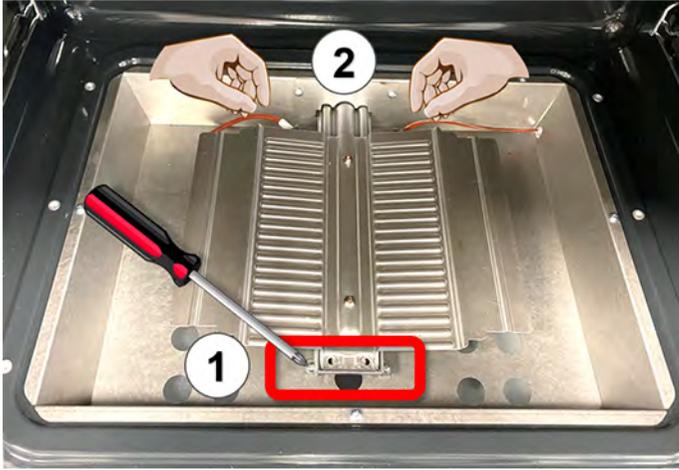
Removing bake burner screws (1) and spark igniters (2) - 30 inch model shown
